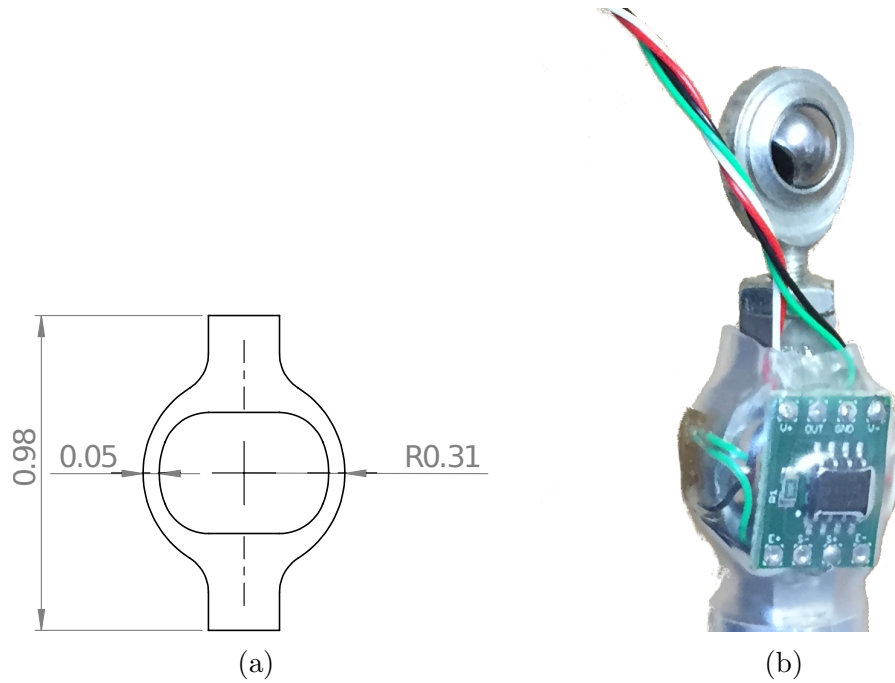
Strain gauge hoop (a) Dimensioned drawing (in) (b) Assembly with amplifier board
